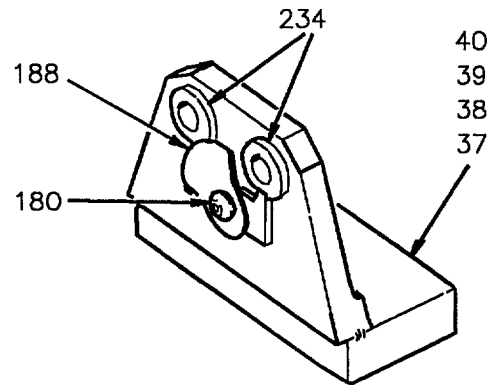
Installation of Flap with Undamaged Bushings into Fixture (Sheet 1)
